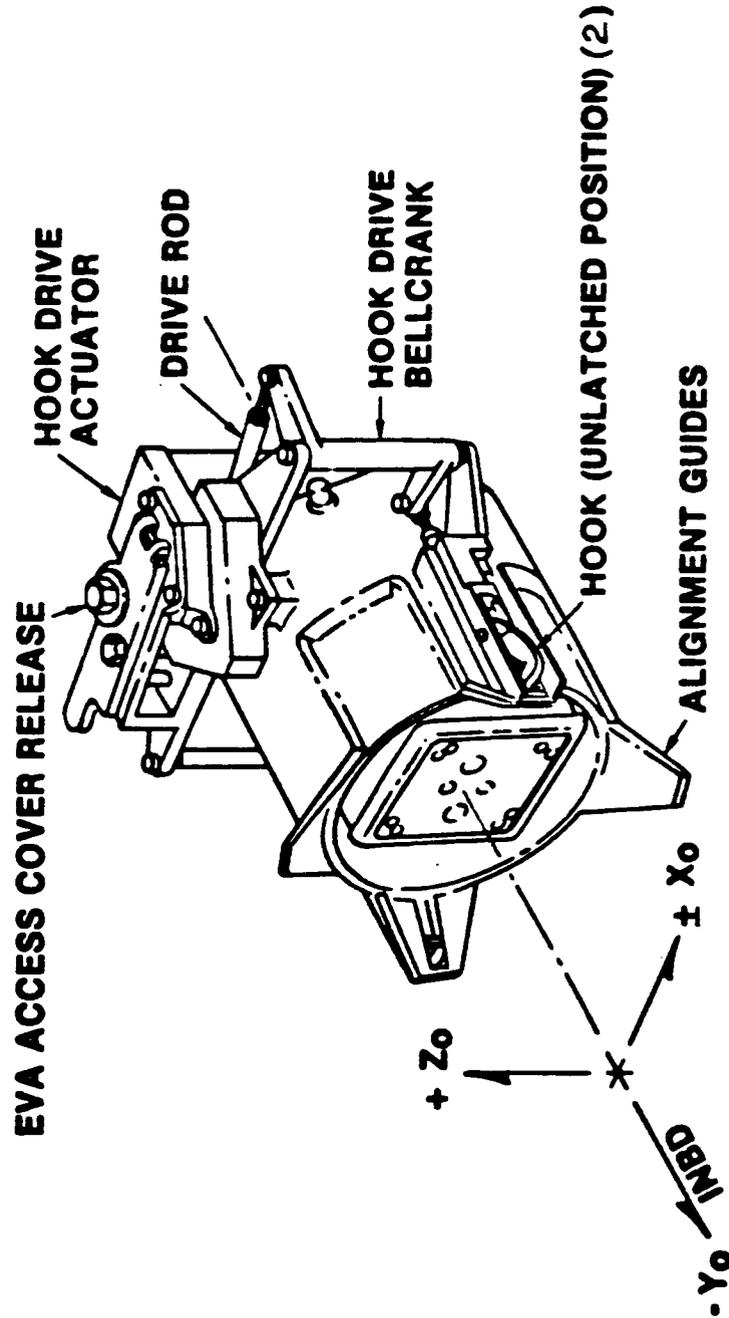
ORBITER DISCONNECT ASSEMBLY
